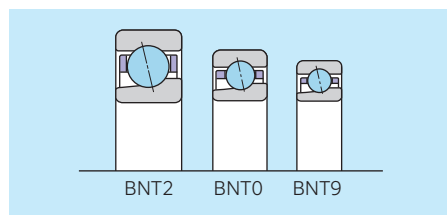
High speed angular contact ball bearings for grinding machines/motors
